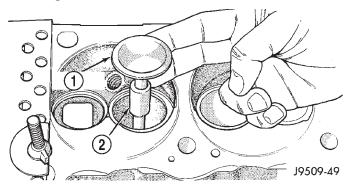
Positioning Valve with Tool C-3973 1 - VALVE
